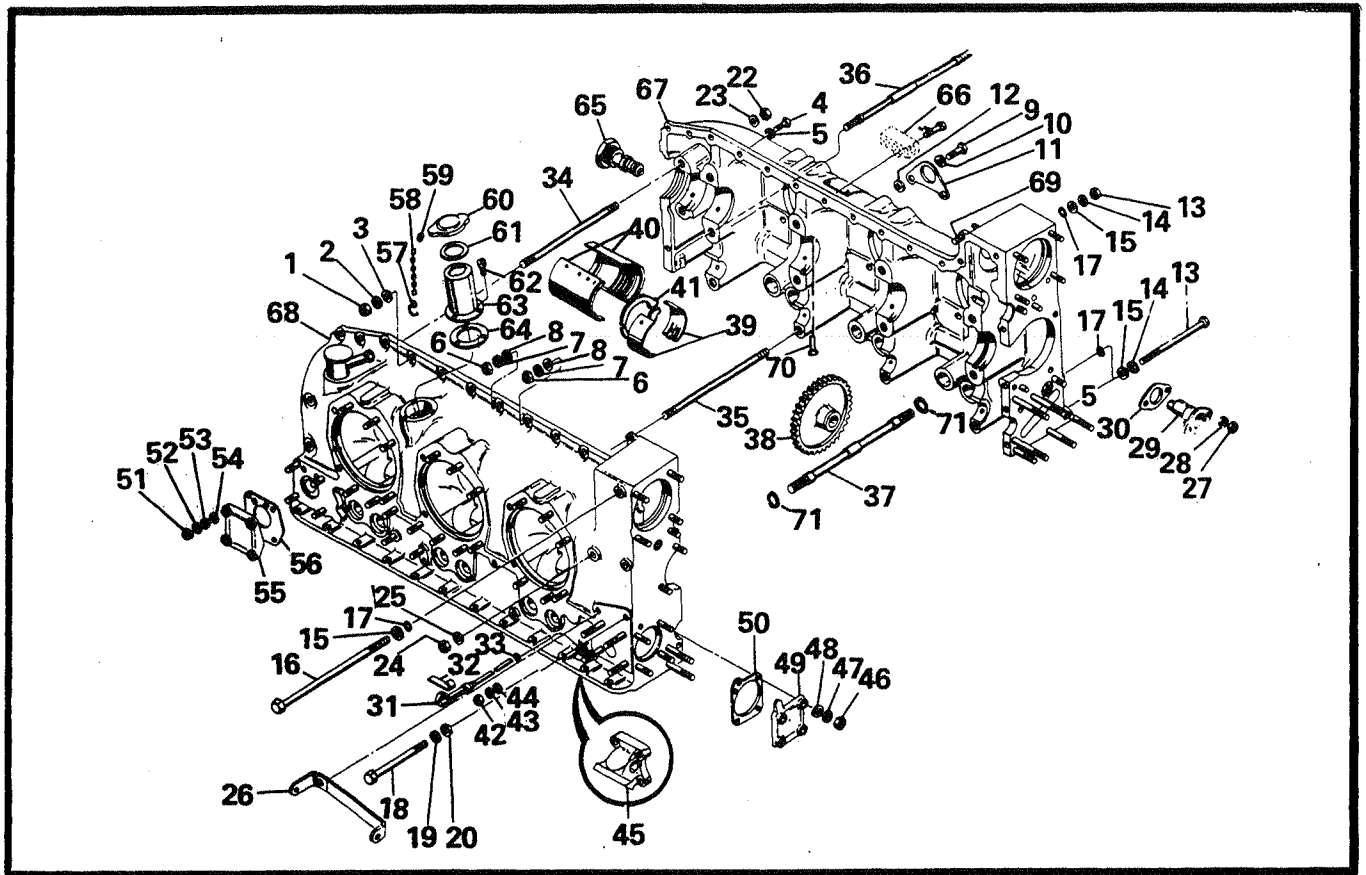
CRANKCASE ASSEMBLY.
